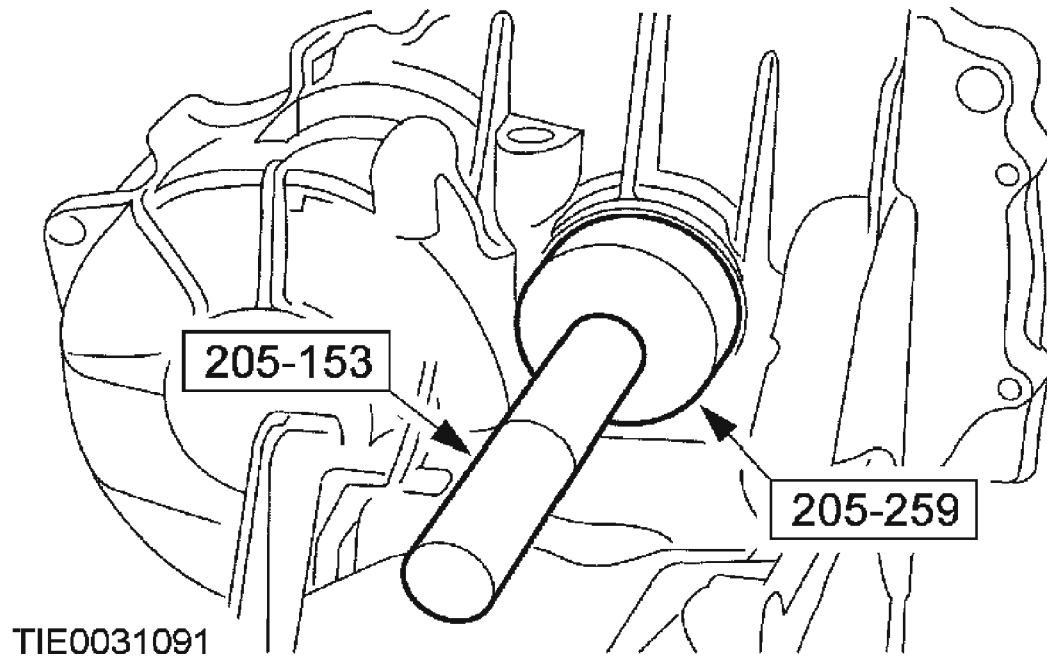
Installing Half Shaft Seals Using Special Tool (Left-Hand)
